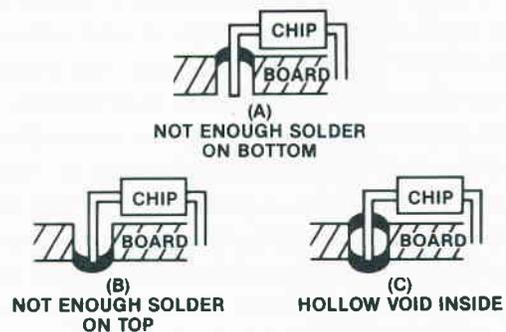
Examples of inadequate soldering on a printed-circuit board.
